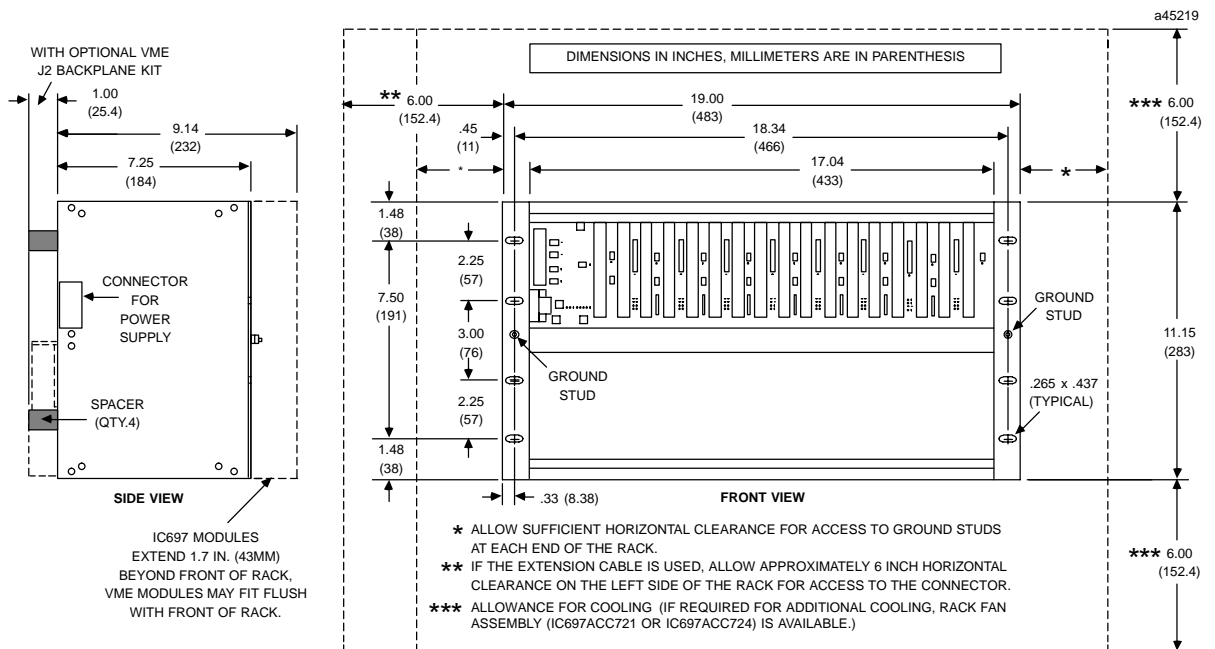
VME Integrator Rack Dimensions for Panel (Front) Mount
